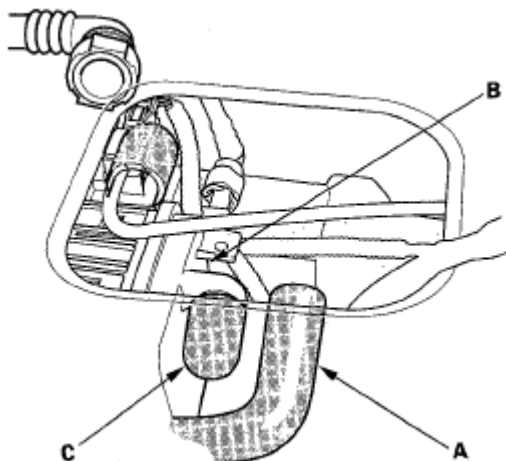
Identifying EVAP Canister Vent Shut Valve Ports And Fresh Air Hose
